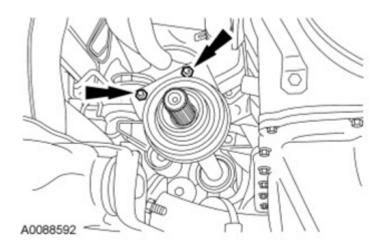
Locating Intermediate Shaft Bearing Retainer Nuts Courtesy of FORD MOTOR CO.
